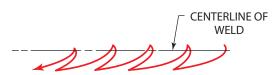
A "J" weave pattern for horizontal welds.
